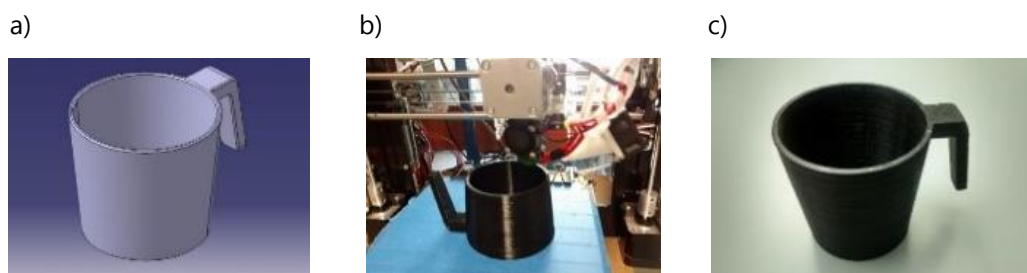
(a) Mug Design | (b) Mug printing process | (c) Mug printed
